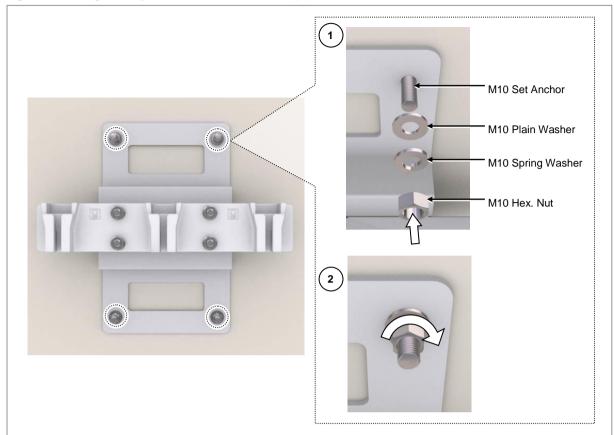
Fixing Side by Side Bracket on the Wall (2)
